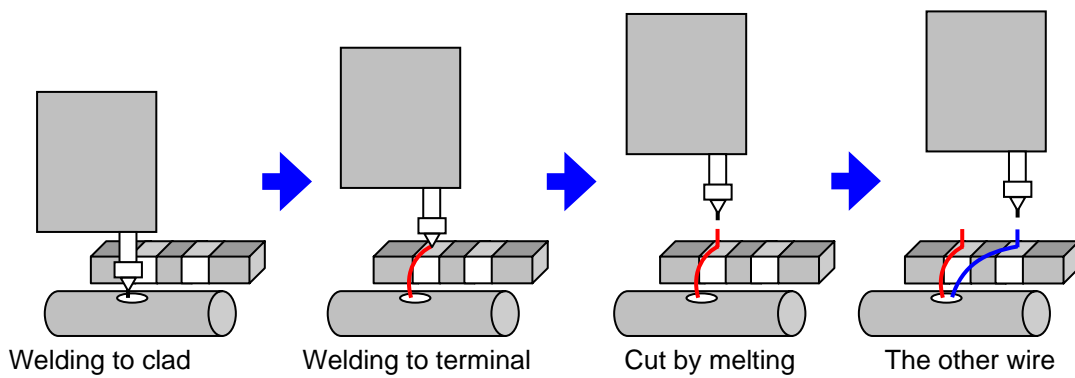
Spot-welding procedure for cladding surface thermocouple
